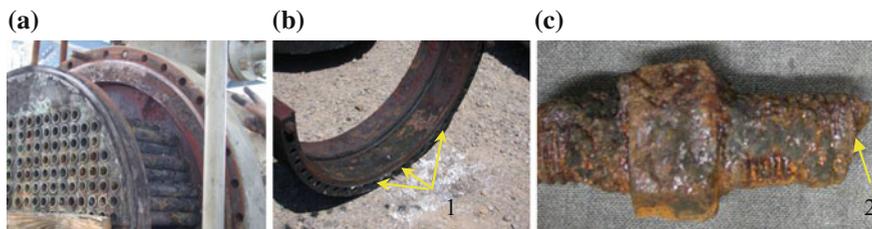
a, b The heat exchanger parts. 1 Places of failed stud bolts. c The failed stud bolt. Rust was formed after the opening of heat exchanger during immersion on the air. 2 Fracture surface
